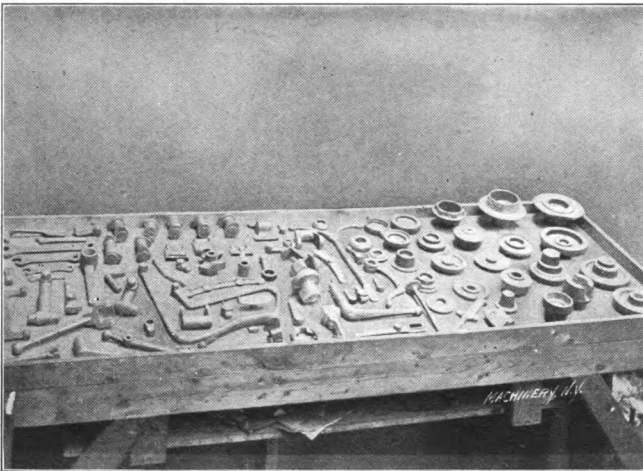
Samples of Lead Castings or Proofs Taken from Drop Forging Dies for Testing the Accuracy of Outline
